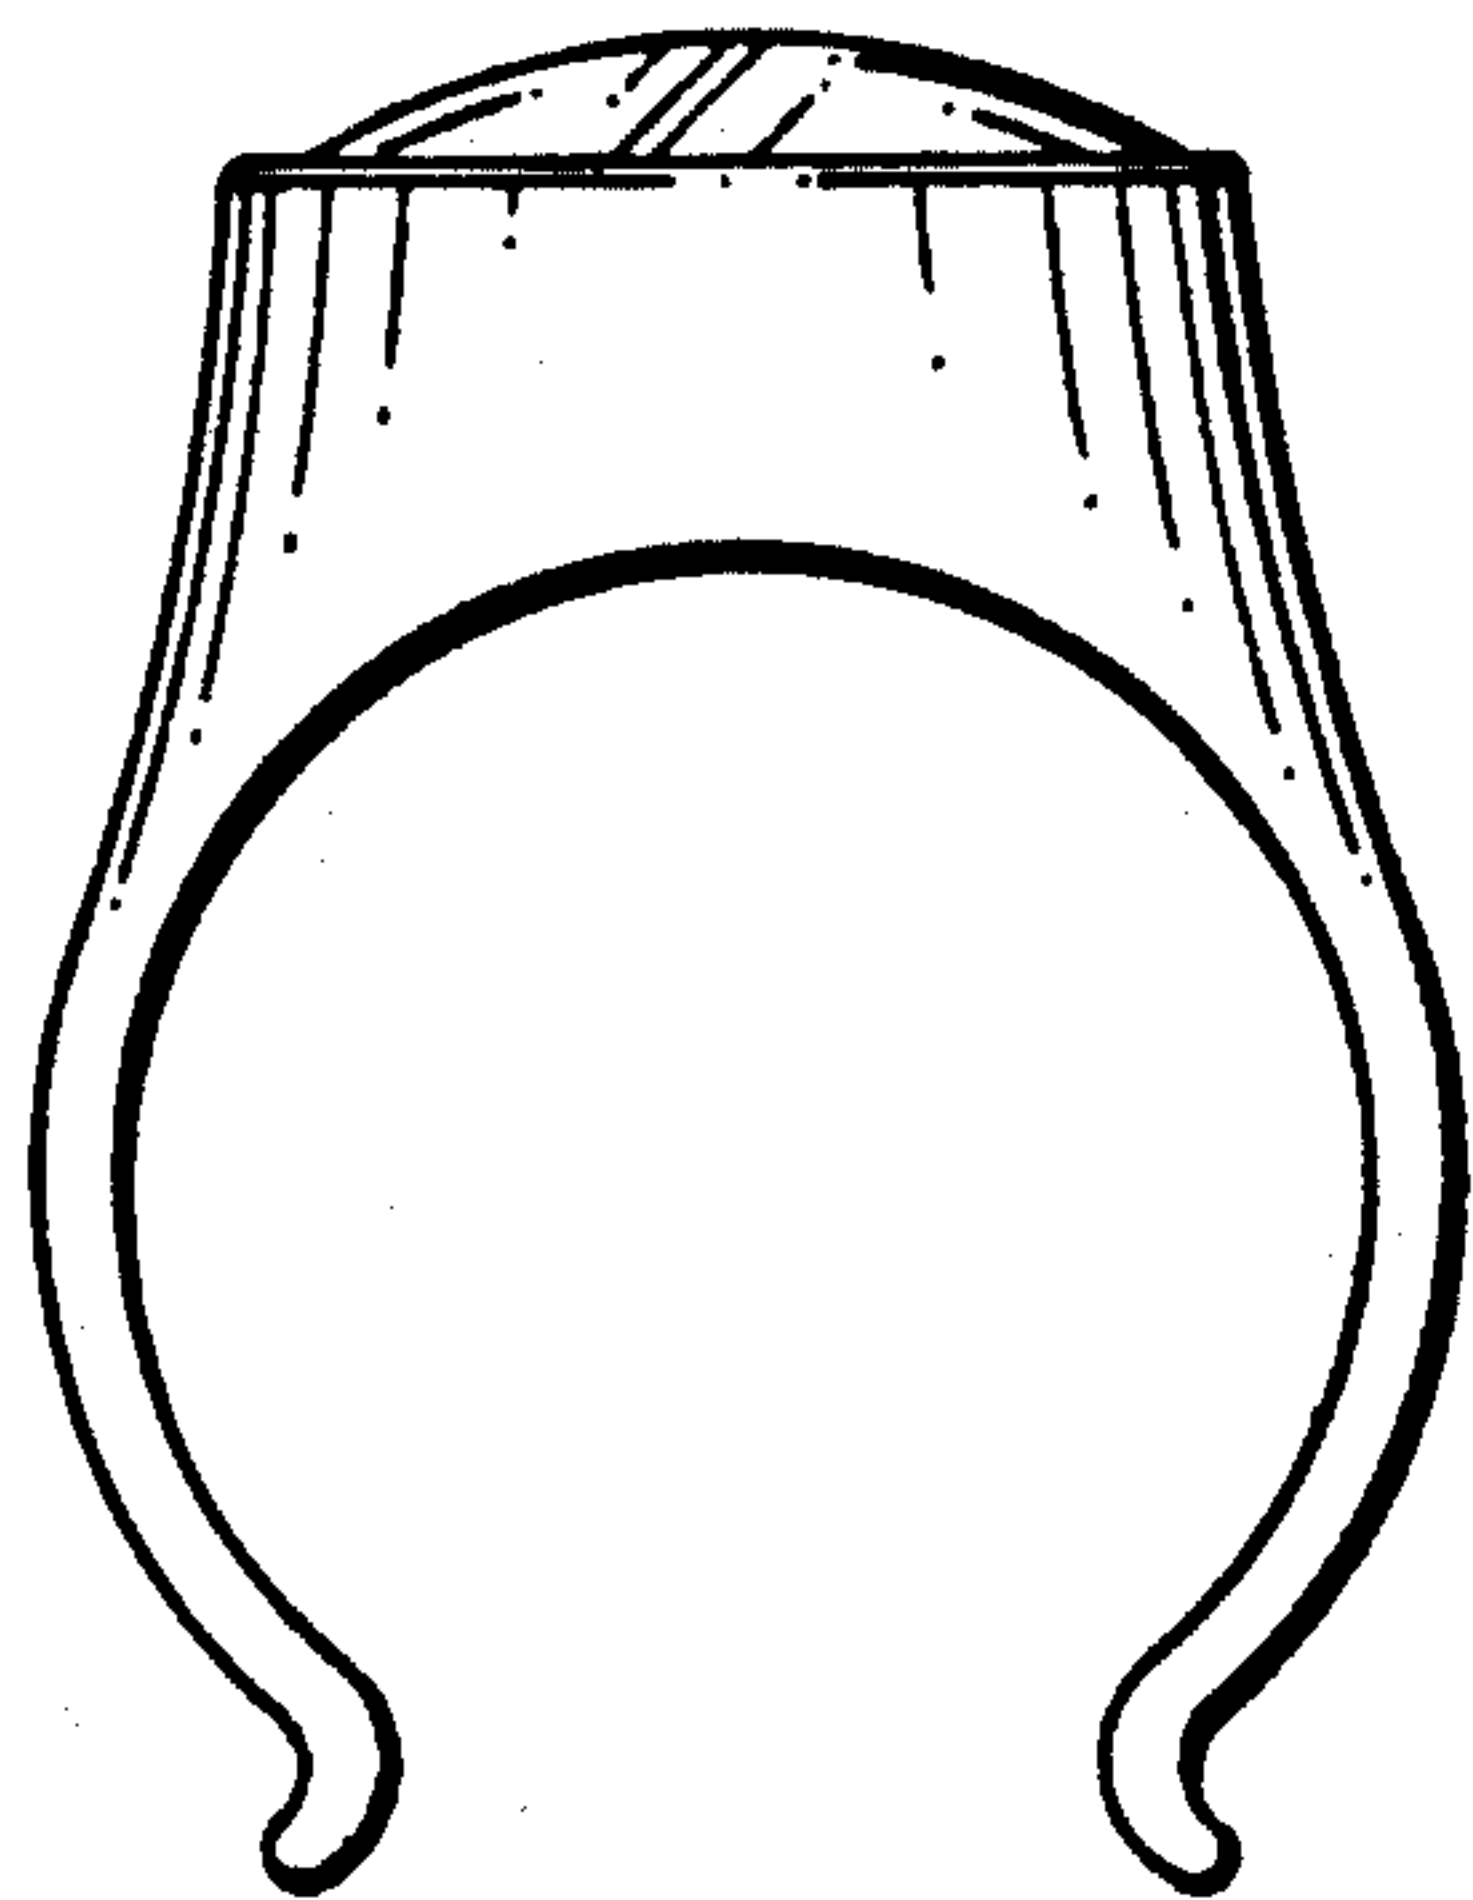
is a plan view of a bottom of the indicator mounting clip.
